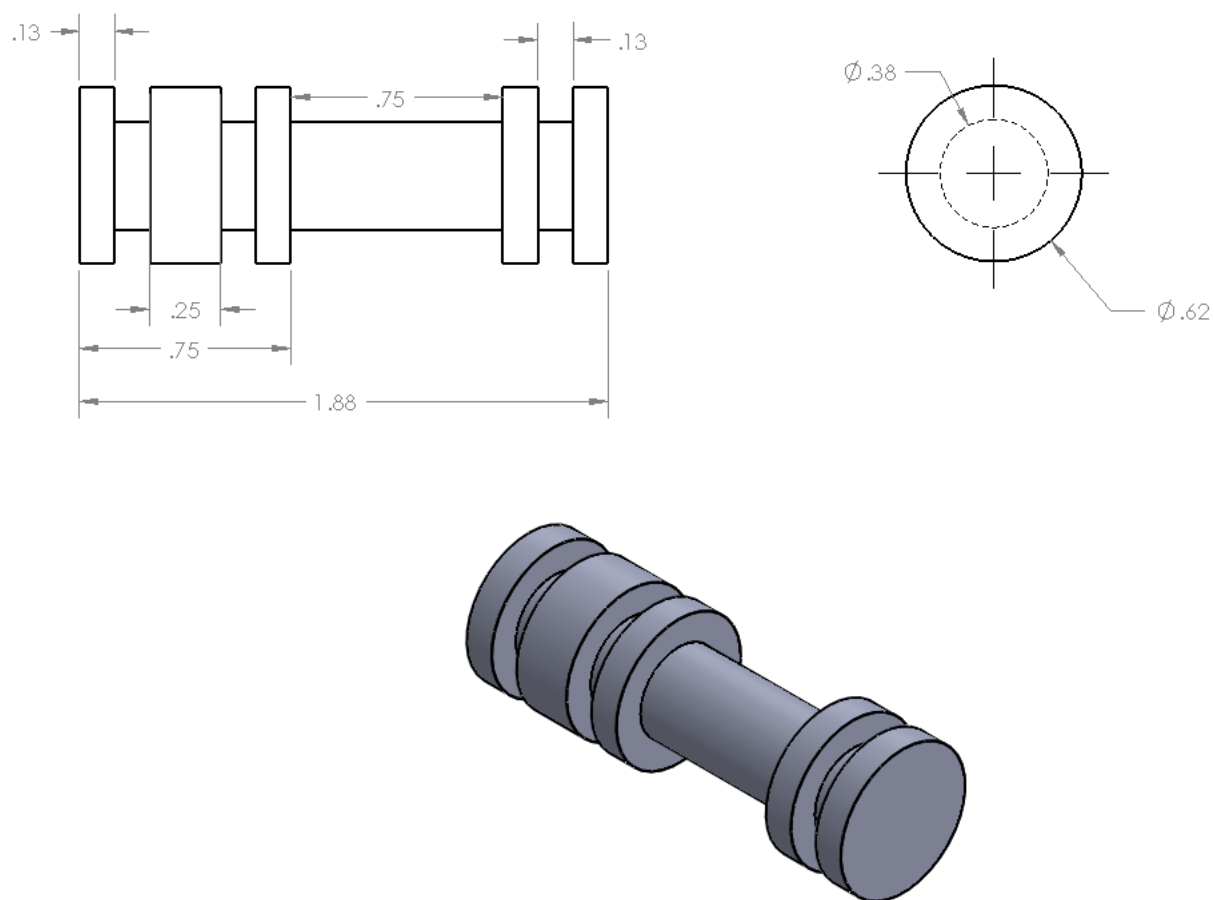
Solidworks drawing of pyrotechnic valve piston.
